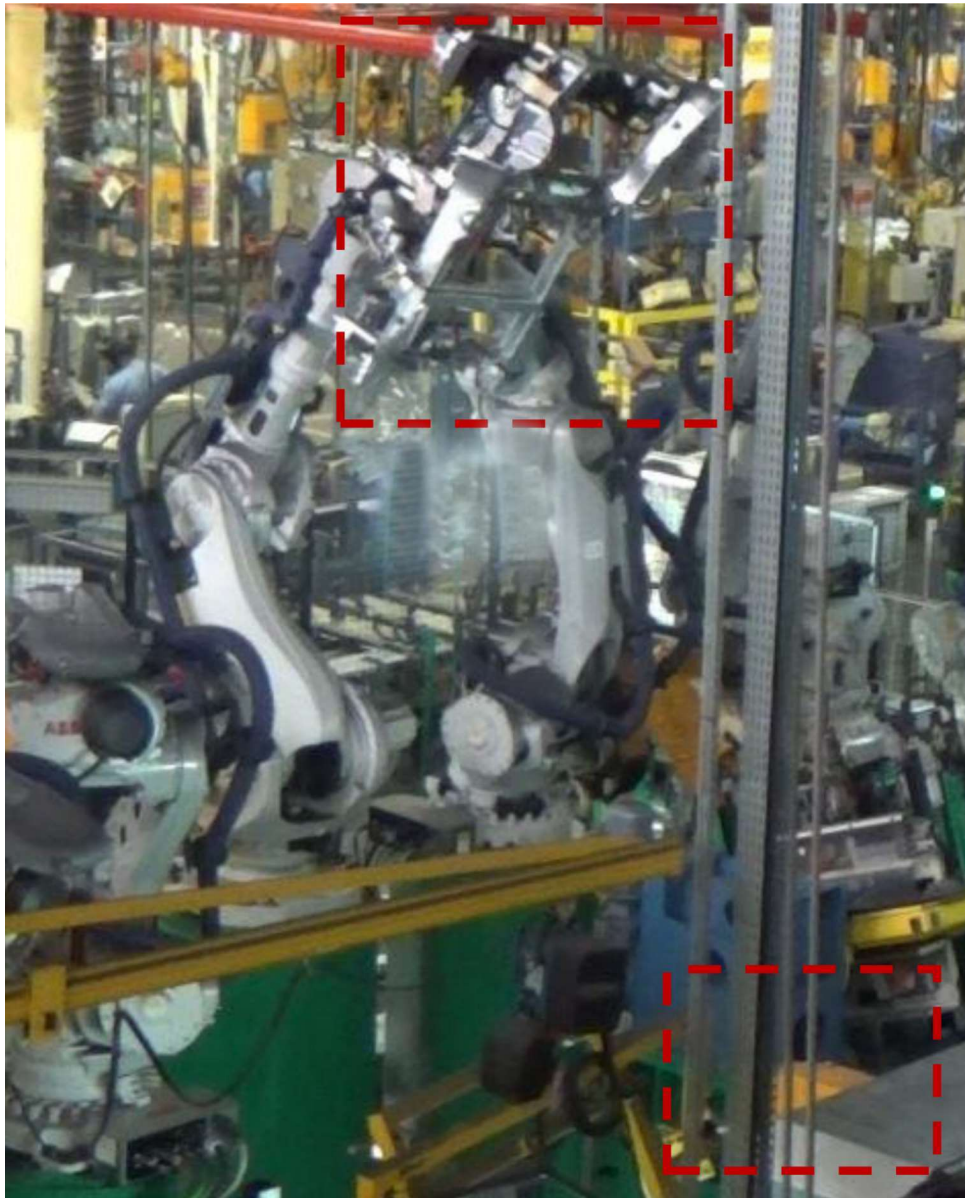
Transporter robot holding the entire work-piece and manipulating it to the welding gun placed on the line's sideways. The work-piece that the robot holds and the static yellow welding gun are highlighted in the picture.
